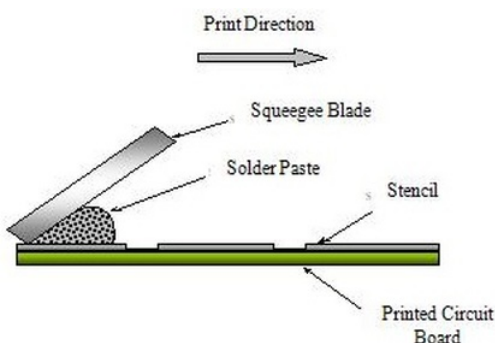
The process of rubbing solder paste over a PCB in SP machine. [3]
